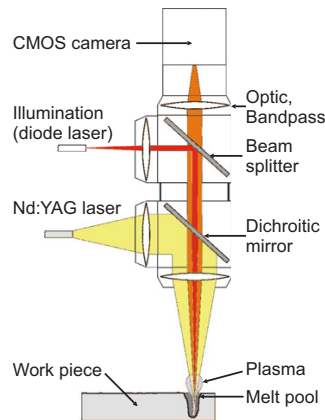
Welding system with extension for image acquisition and additional illumination [5].
